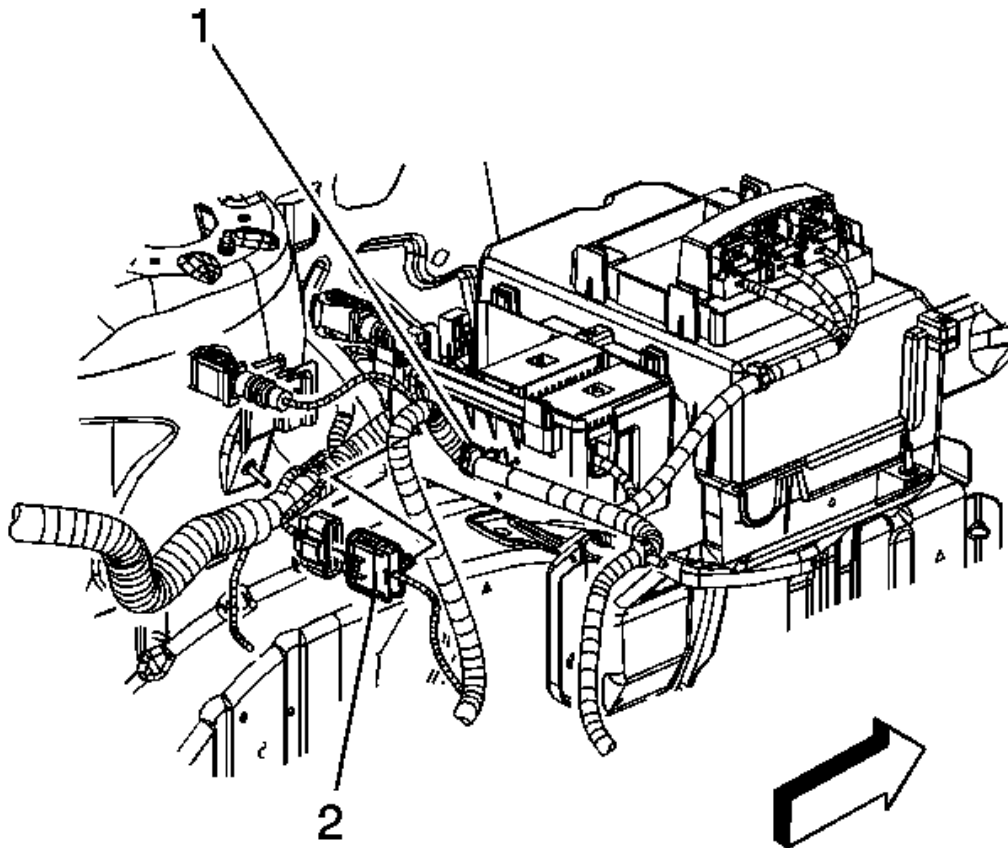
View Of Engine Wire Harness Retainer & Connector
